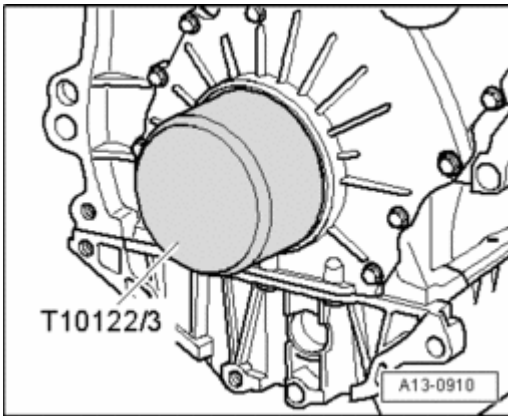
Pressing In Oil Seal With Press Tool T10122/3 Evenly And Flush
